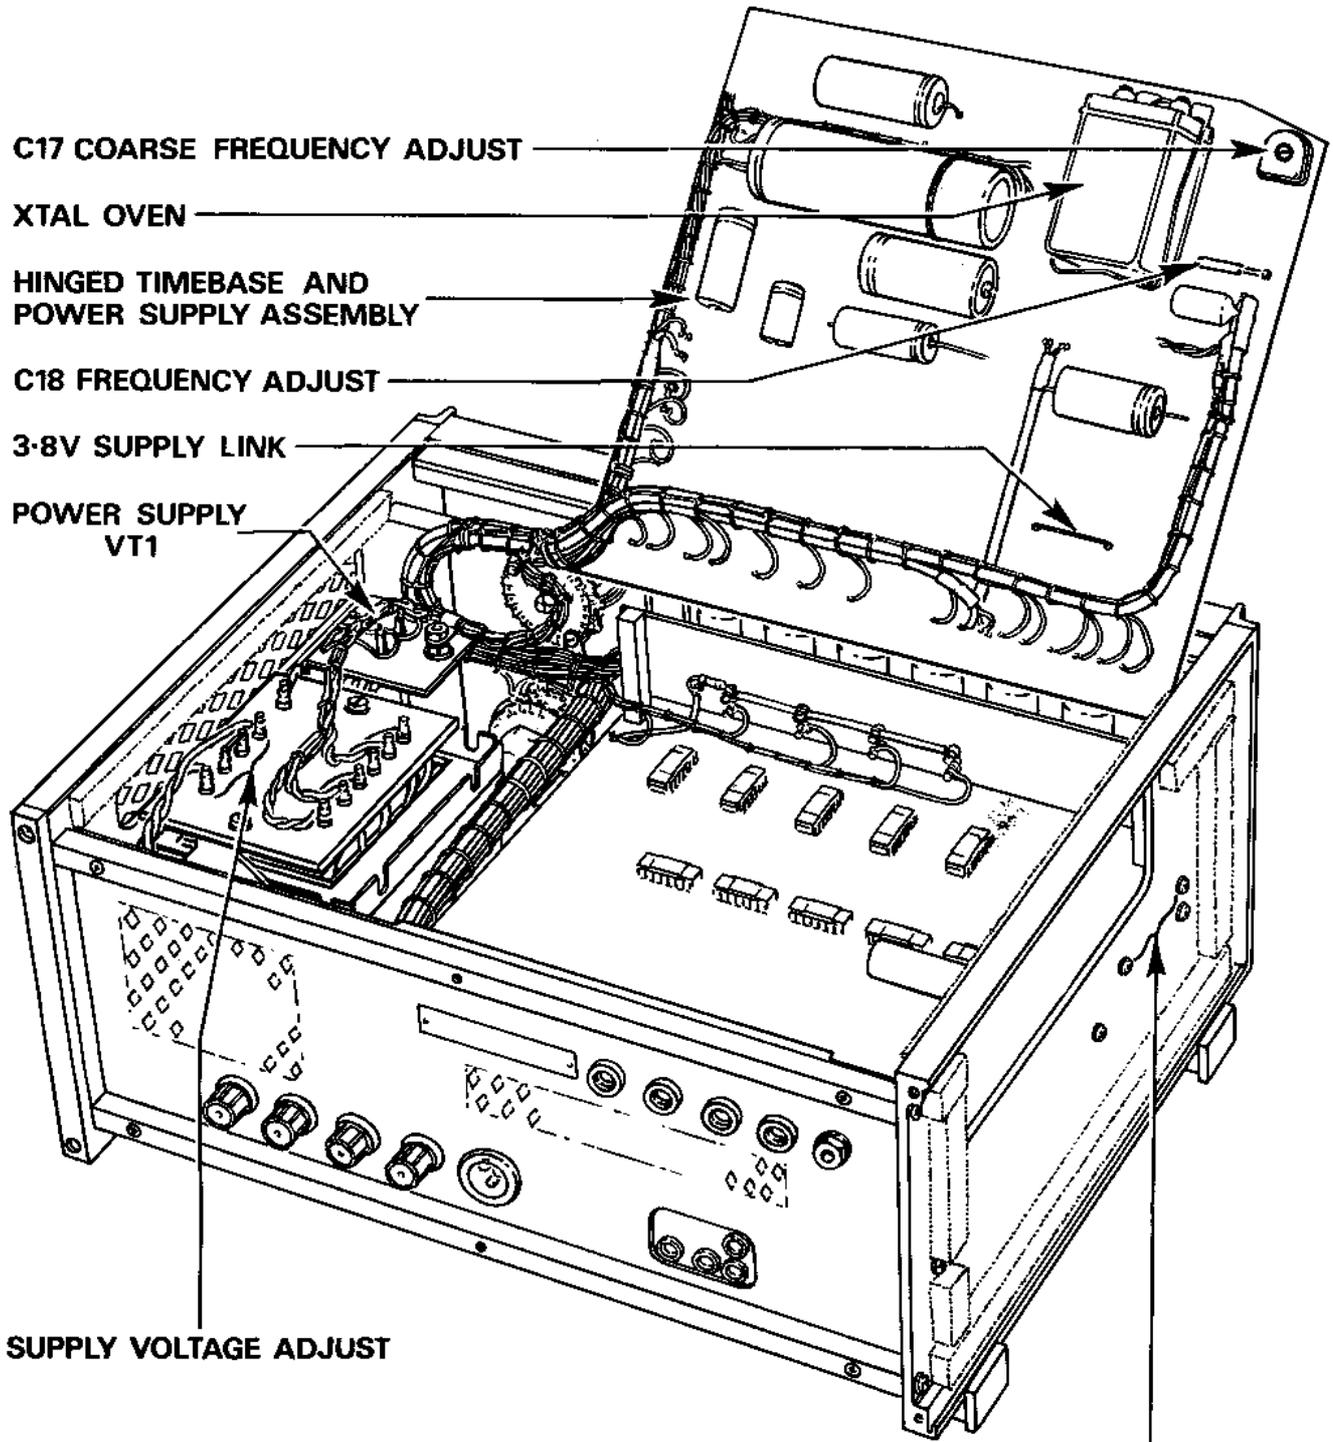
COMPONENT LAYOUT (TOP VIEW)
